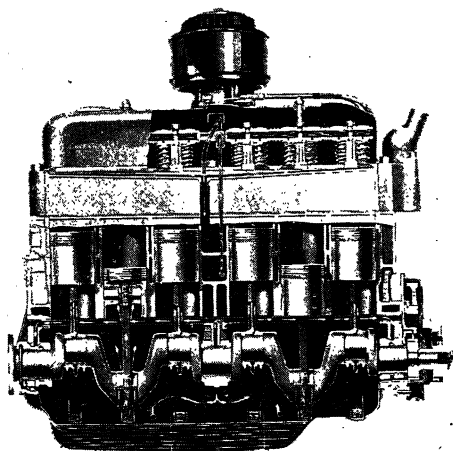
Crank shaft, pistons, etc., in gasoline engine. (Courtesy General Motors.)
